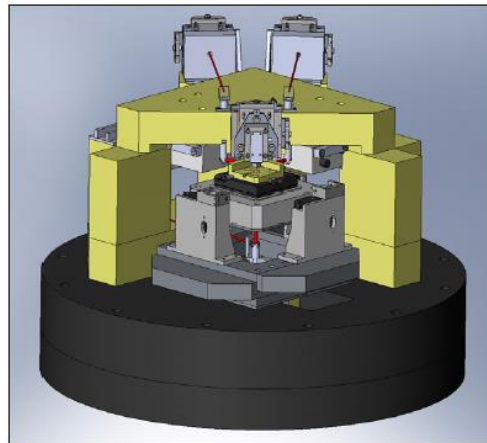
Photograph of homemade enlarged sample holder for optical AFM imaging
